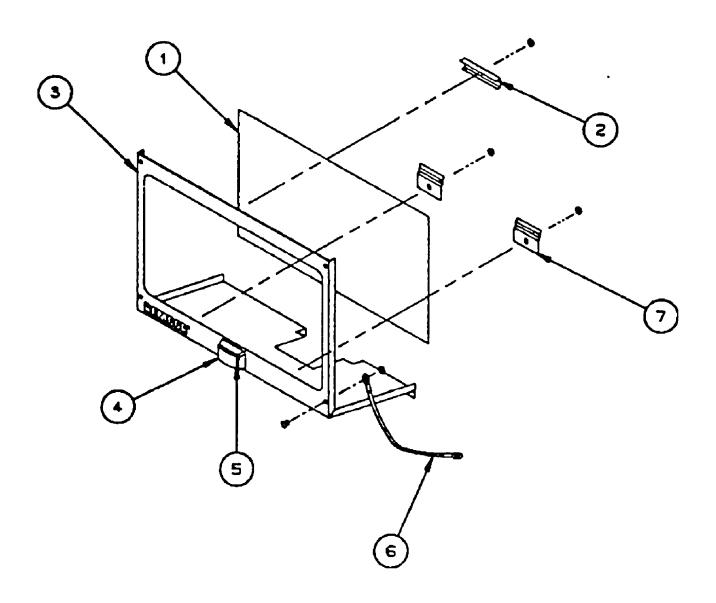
EXPLODED VIEW & PARTS LIST DB90-BC MERCHANDISER SECTION
